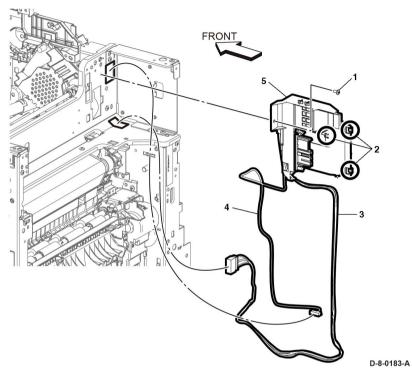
AC 100V/200V/-CF fusing harness assembly removal
